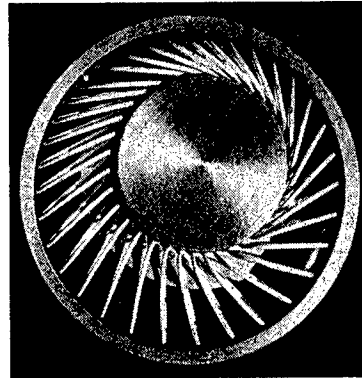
Illustration of tolerance in eccentricity.
